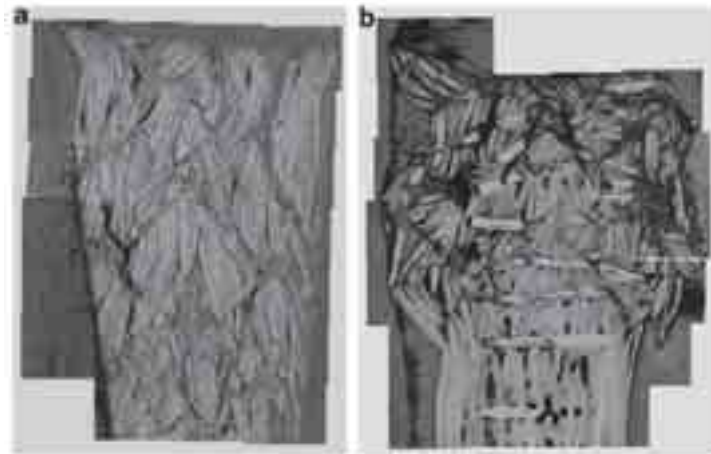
Cross section showing failure of: a) specimen without z-pins, b) with z-pins reinforcement [7]
